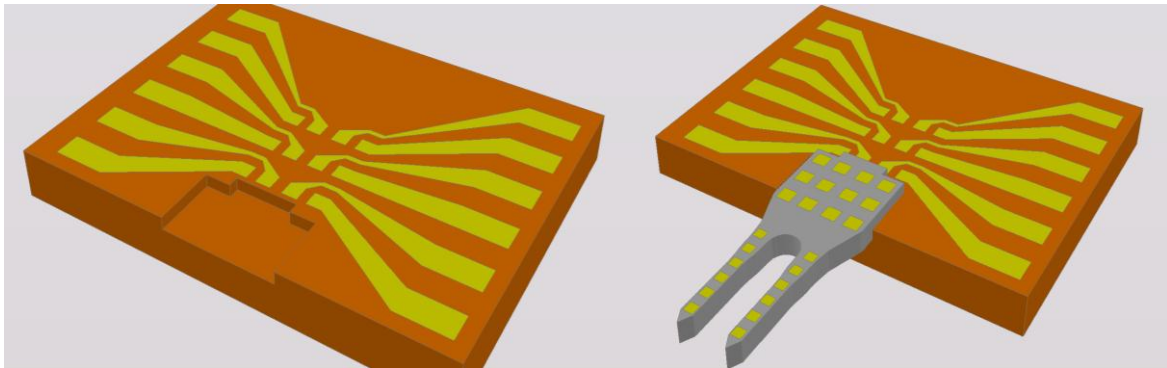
Carrier wafer for the two shaft double metallization layer stimulation electrode, Top: Carrier wafer with pads, tracks and alignment groove, Bottom: Carrier wafer and electrode assembly
